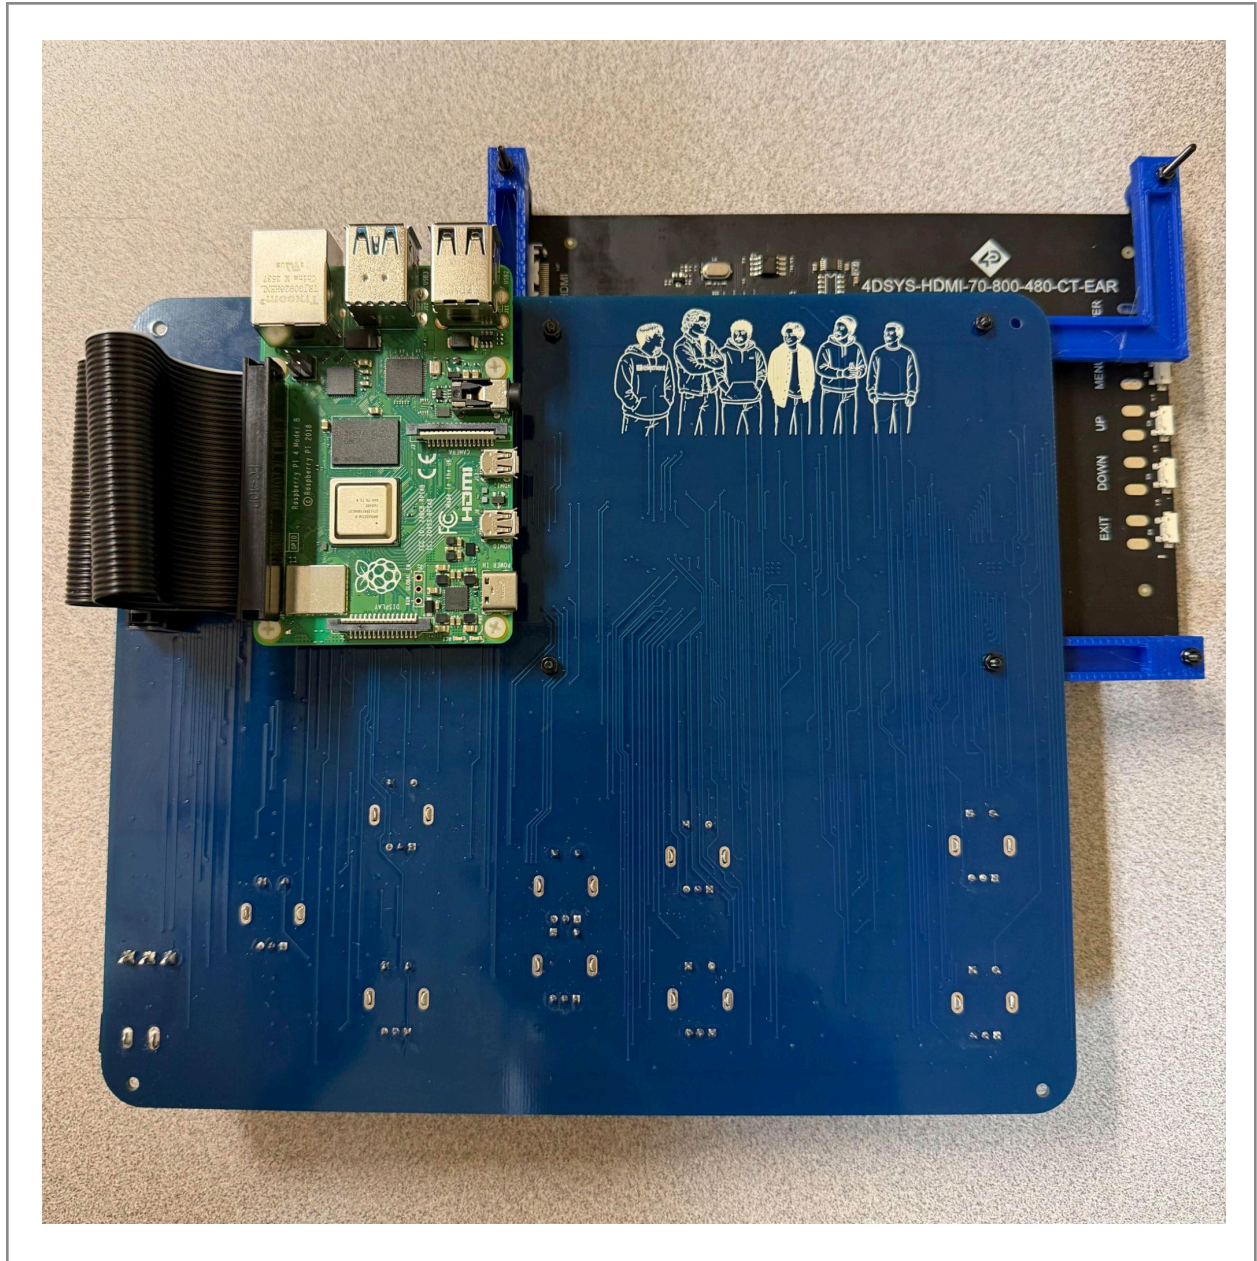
Assembled PCB, bottom side with Raspberry Pi 4 attached via M2.5 standoffs and 2x20 header
